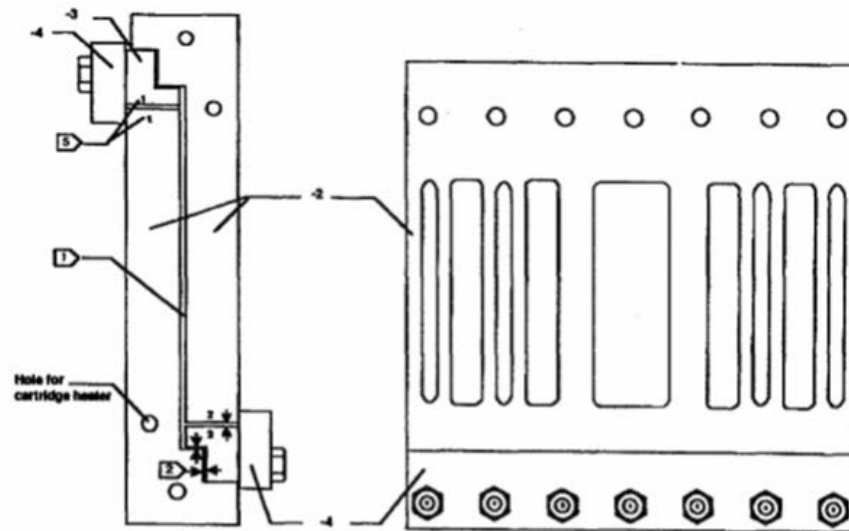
presents the damage tolerance test fixture which receives the 10"W x 12" L uniaxial compression loaded damage tolerance coupon. The coupon is sandwiched between a front and rear plate. Note the windows which are machined into the plate. The windows allow for strain gage placement and allow the impact area sublaminates to freely buckling out of plane. Several window sizes are available depending on delamination size. Thinner laminates will have small delaminations allowing smaller windows; the smaller window also precludes panel buckling.
